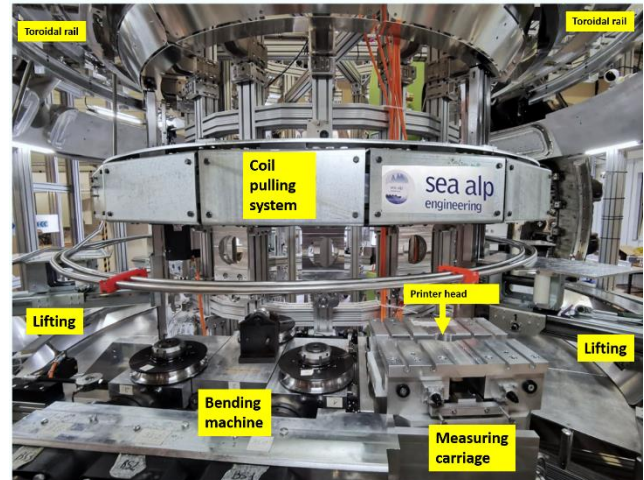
Inside the AUG twin: the main component inside the dummy vacuum vessel are highlighted.
